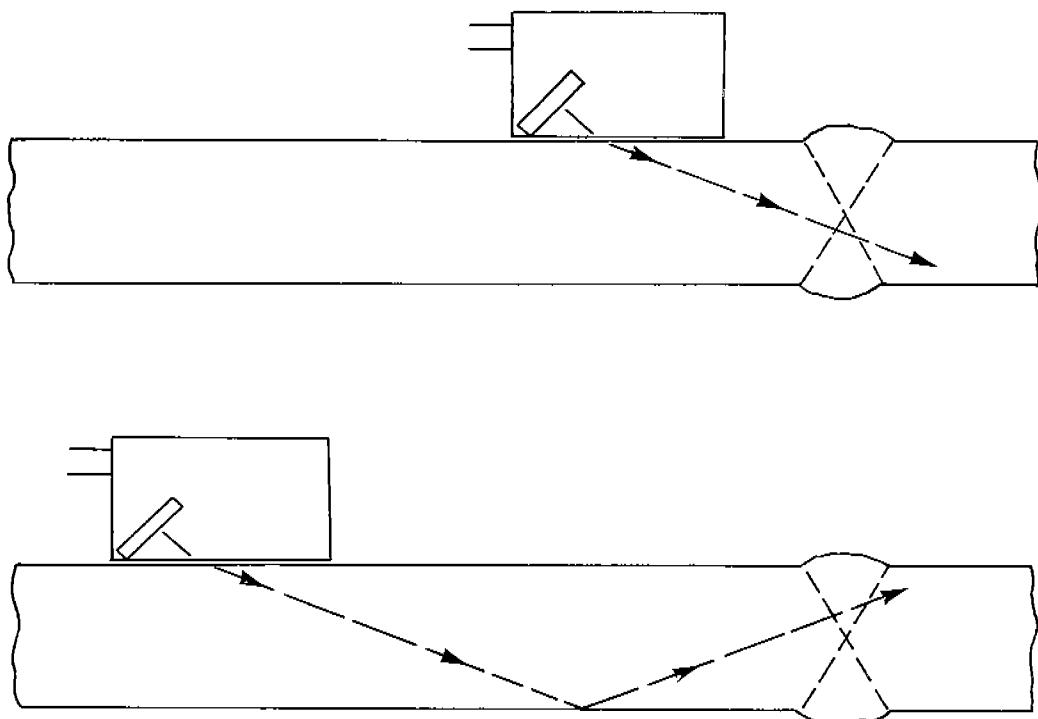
Technique for Inspecting Butt Welds with Shear Waves.
